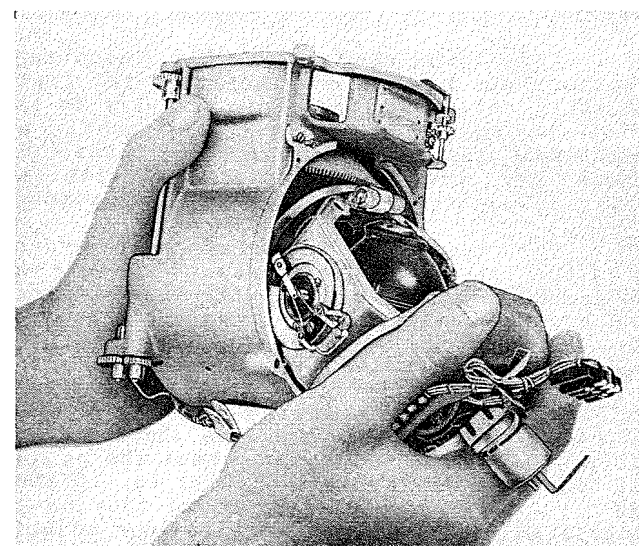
N. Installation of Gyro and Gimbal Assembly. (Attached to Cap and Stator) Into the Frame
